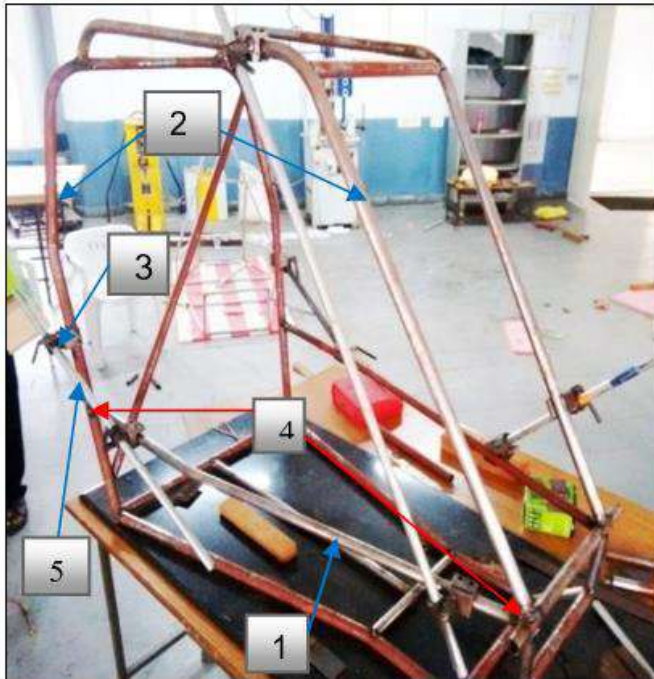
BAJA chassis members are set for welding with the help of these fixtures
